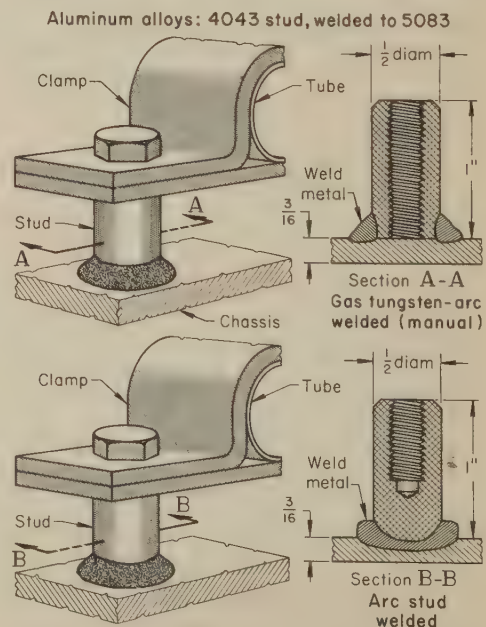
Aluminum alloy studs attached by arc stud welding, instead of by gas tungsten-arc welding, to an aluminum alloy chassis for an amphibious vehicle (Example 169)
